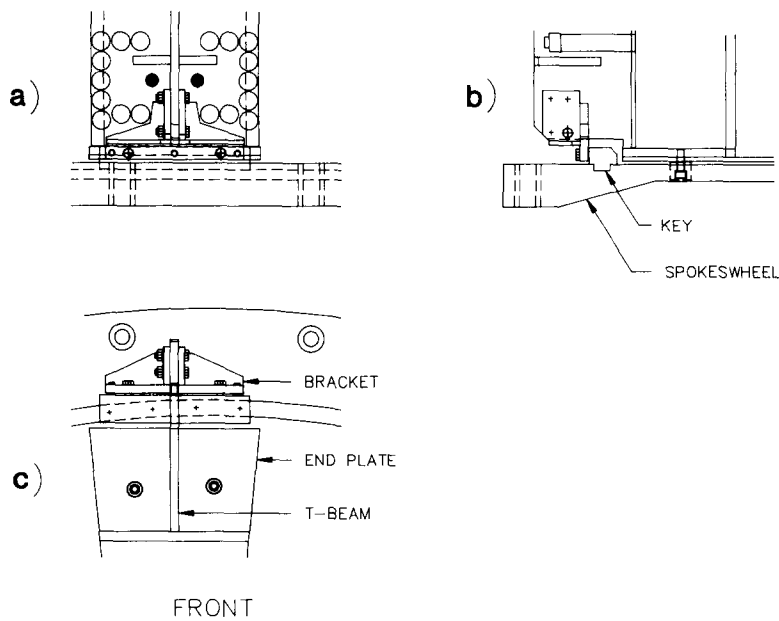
End bracket arrangement showing the attachment of a module to the spokeswheel: (a) top view; (b) side view; and (c) front view.
